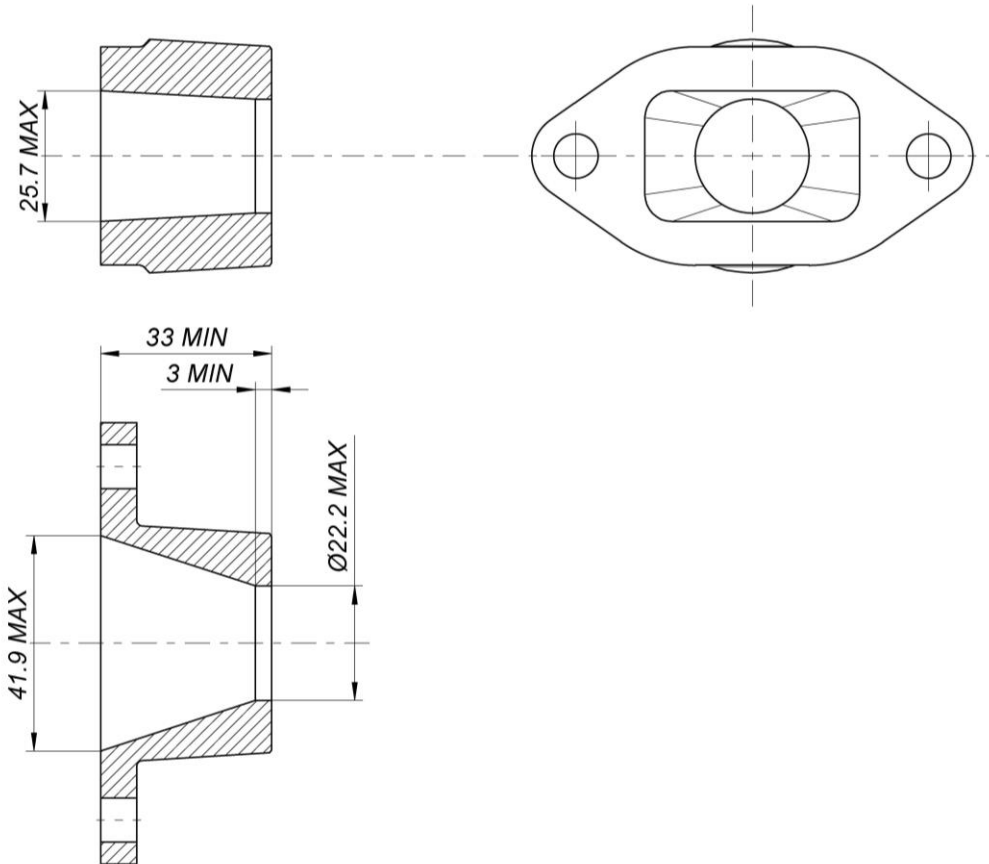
PHOTO IDENTIFICATION OF EXHAUST MANIFOLD RESTRICTED Ø22mm TYPE 3
